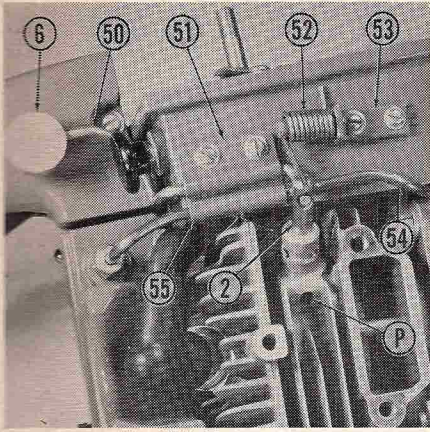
View with muffler assembly removed to show compression relief mechanism. Depressing throttle lock button (6) actuates lever (50) lifting compression relief plunger (2). Engine compression will then force relief valve (steel ball) from seat relieving compression through port (P).
